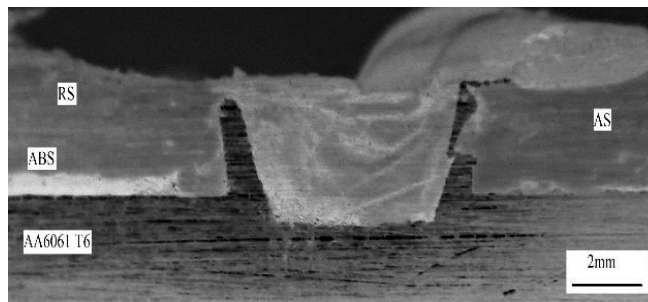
Cross sectional view of joint welded at 1000 rpm tool rotation, 14 mm/min feed rate and 20 mm shoulder diameter.
